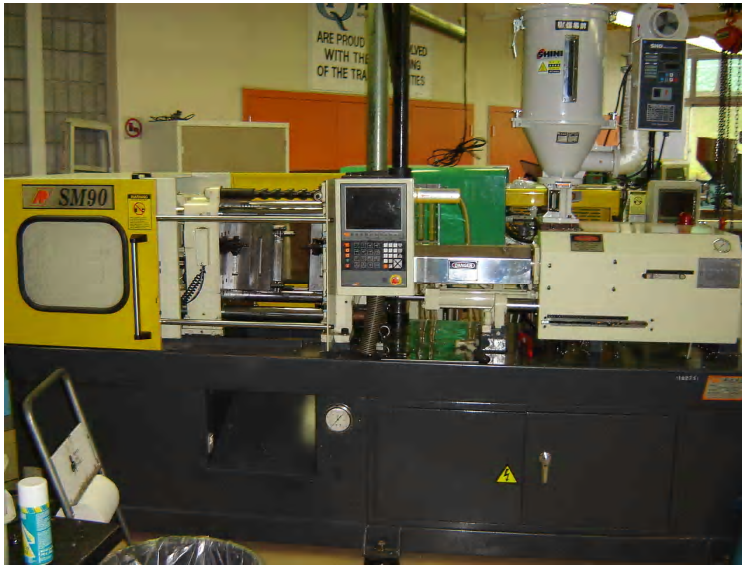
90 Ton injection moulding machine used to conduct the shrinkage tests
